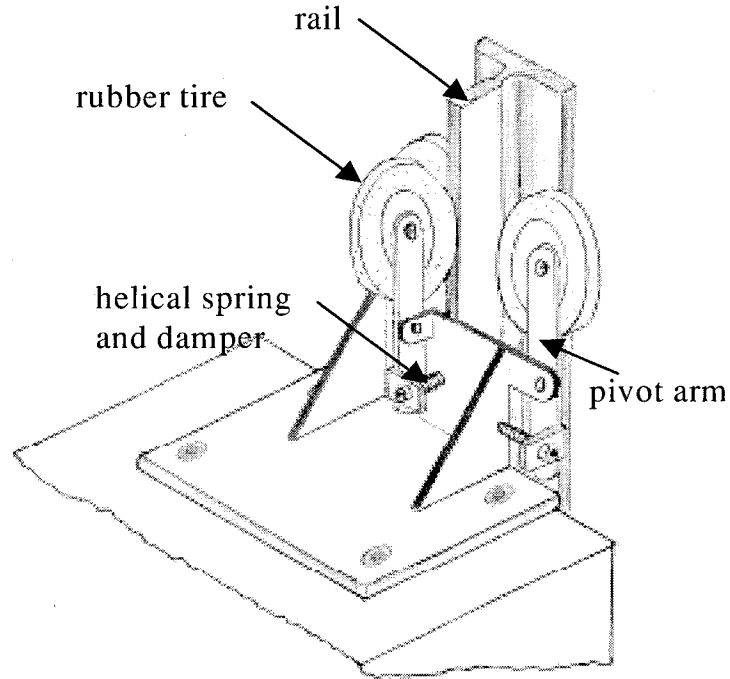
Roller Guide Assembly with Helical Spring and Proposed Dampers
